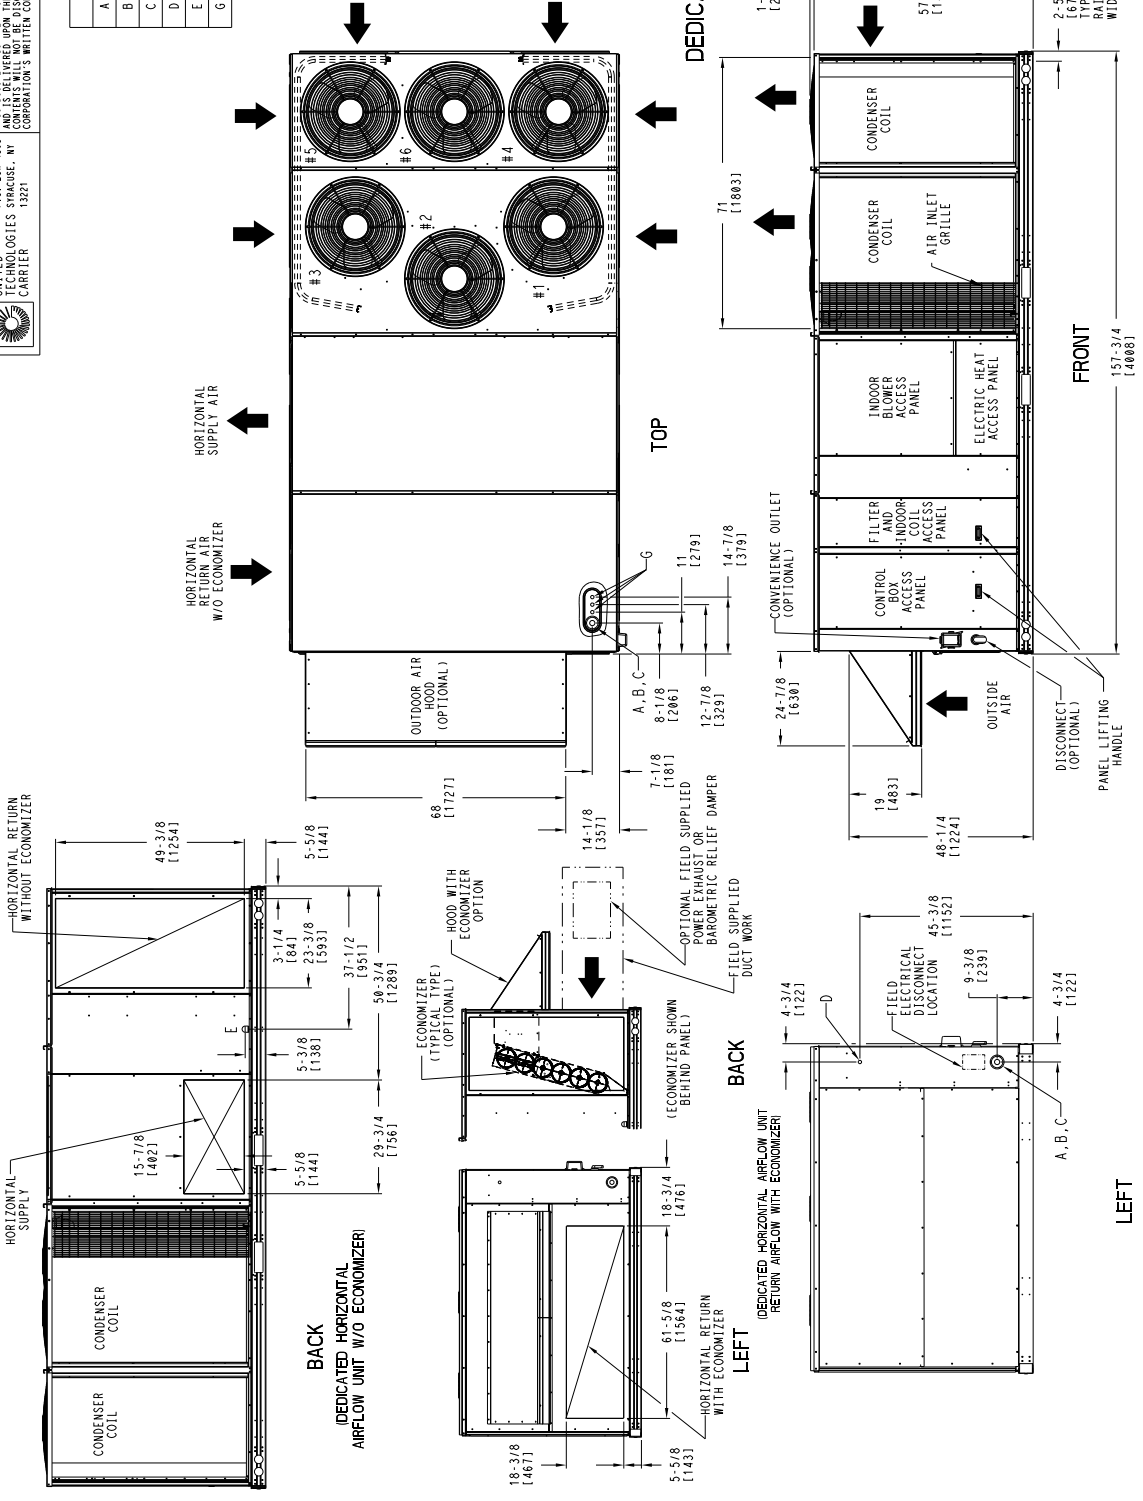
Unit Dimensional Drawing - 24 and 26 Size Units, Sheet 1 of 3
